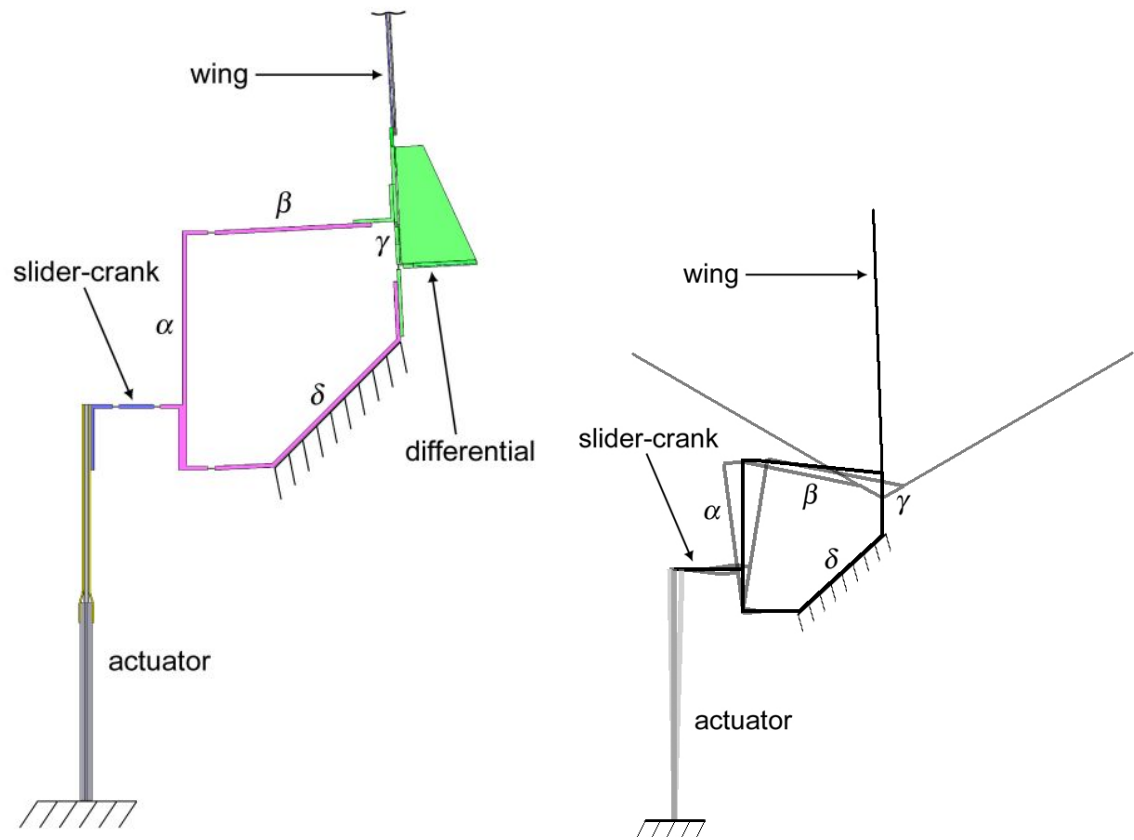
1DOF section of the MFI actuator and thorax structure showing link and flexure detail (a) and kinematic detail (b).
